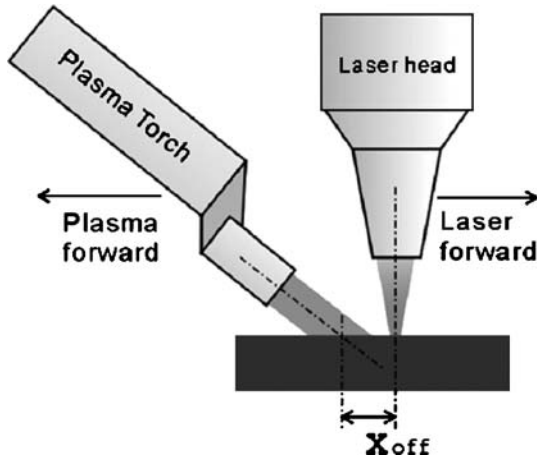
Plasm-augmented laser welding (PALW) setup
